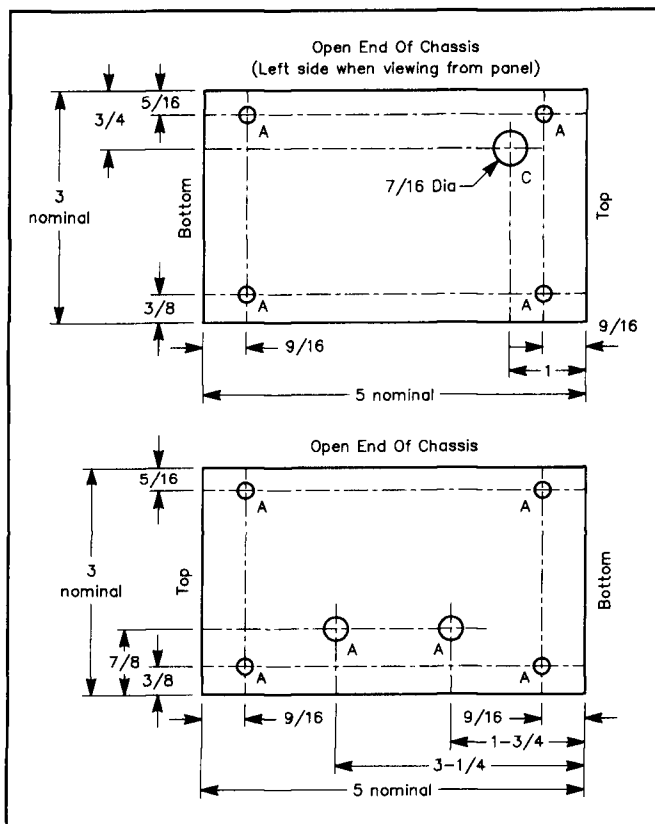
RF deck. At top, tube end; at bottom, flapper end. Holes marked A are chassis mounting holes, No. 23.
